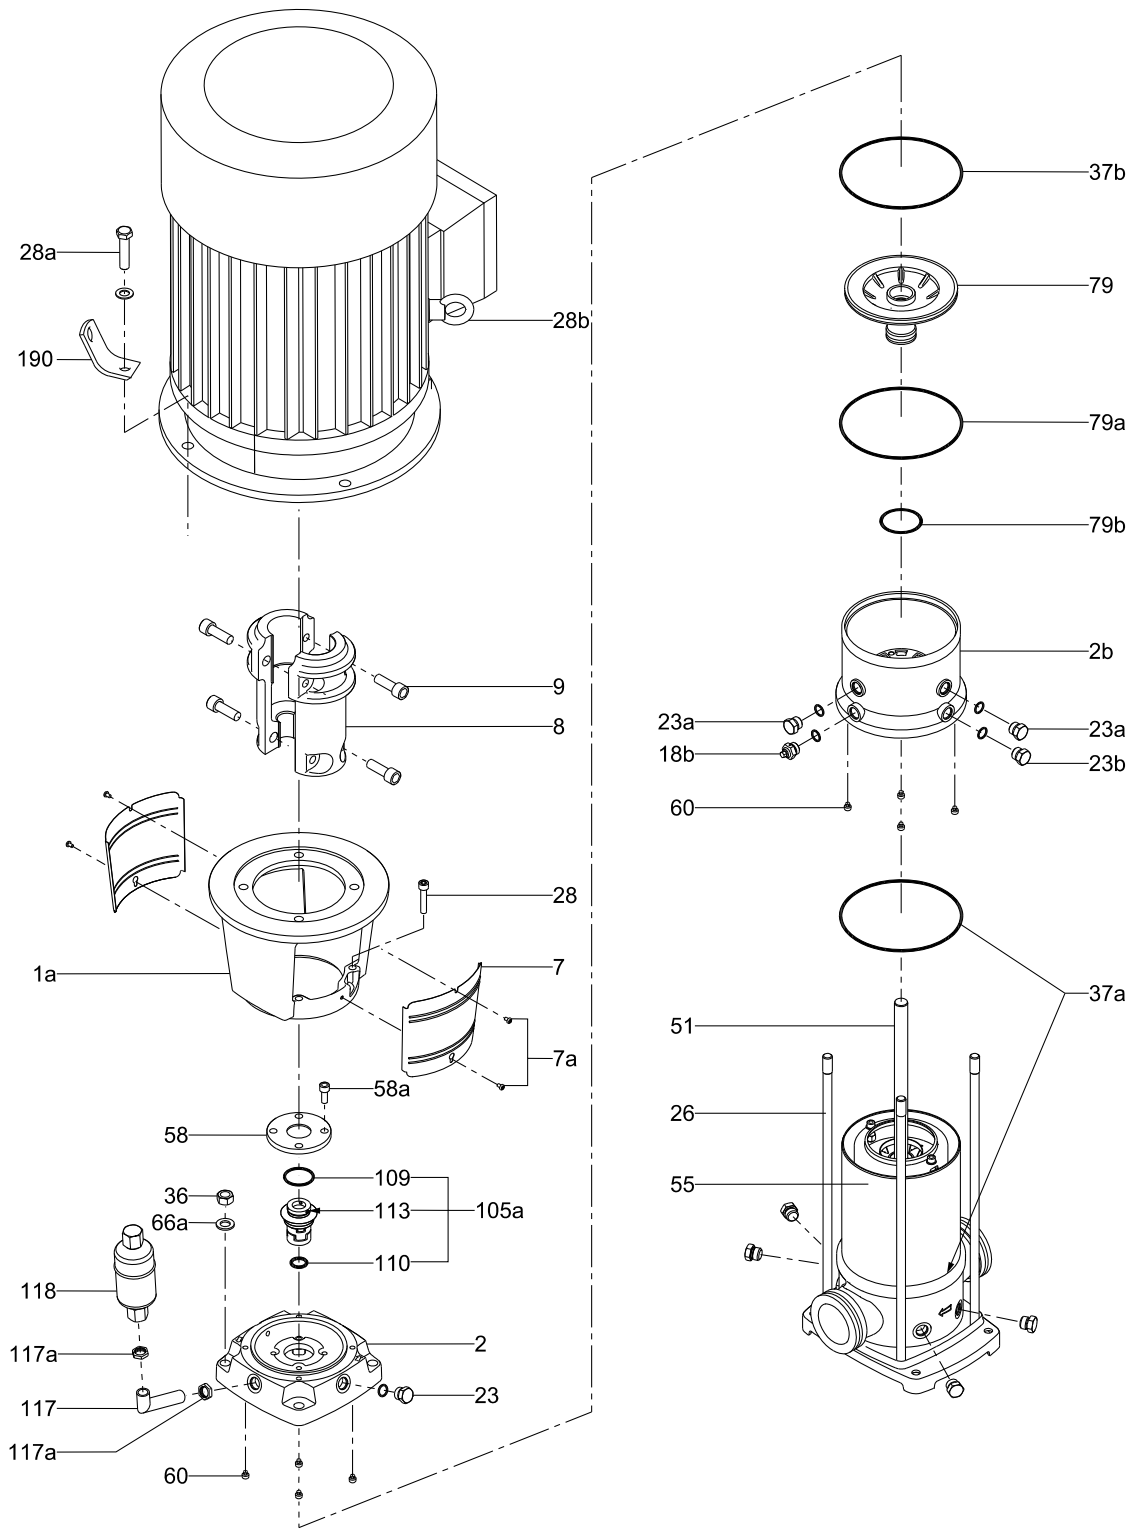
Exploded view, CR, CRN 32, 45, 64, 90, model B (air-cooled top)
